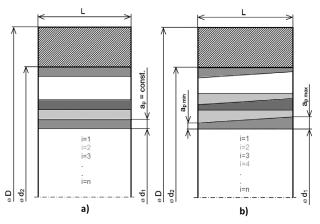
Tool paths: a) a constant depth of cut, b) a variable depth of cut (i < 1, n > = number of tool paths; n = total number of tool paths; L, D, $d_1 =$ dimensions of the workpiece; L, D, $d_2 =$ dimensions of the semi-product before finishing)
